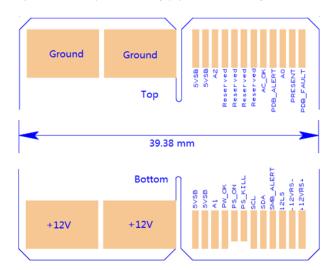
Pin Assignment of DC Output Connector (PCB card edge)
